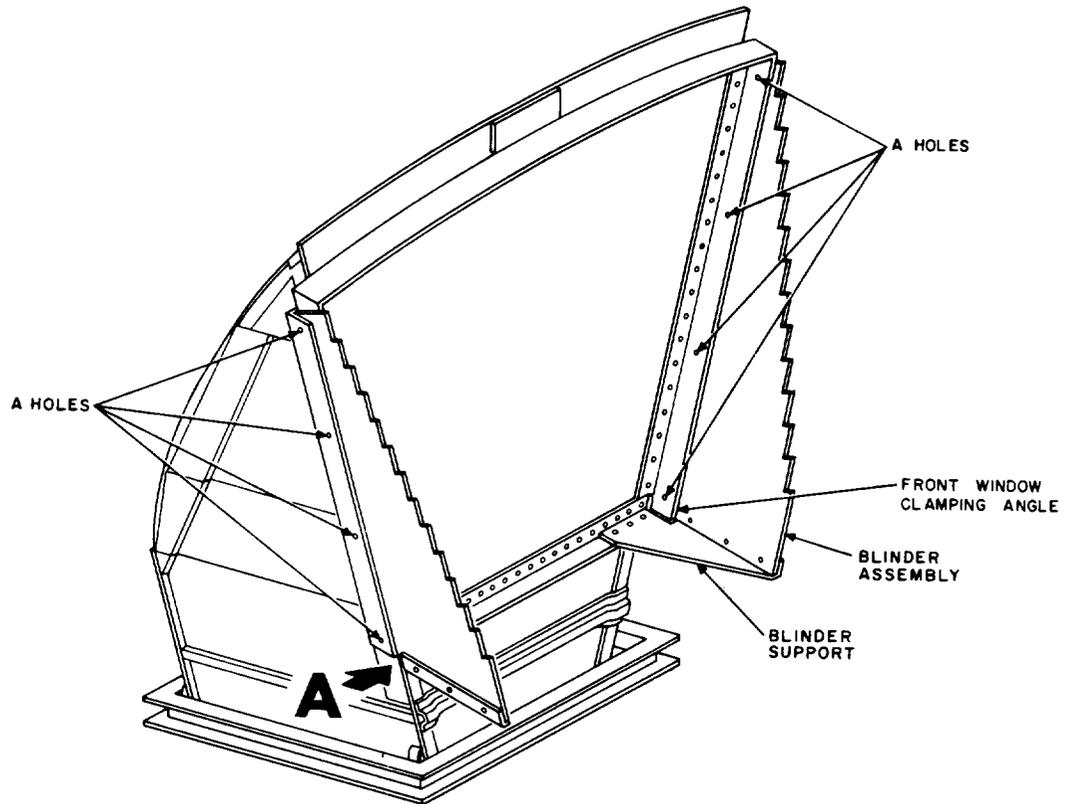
Side View of KS-15676 Antenna With the Blinder Assembly
